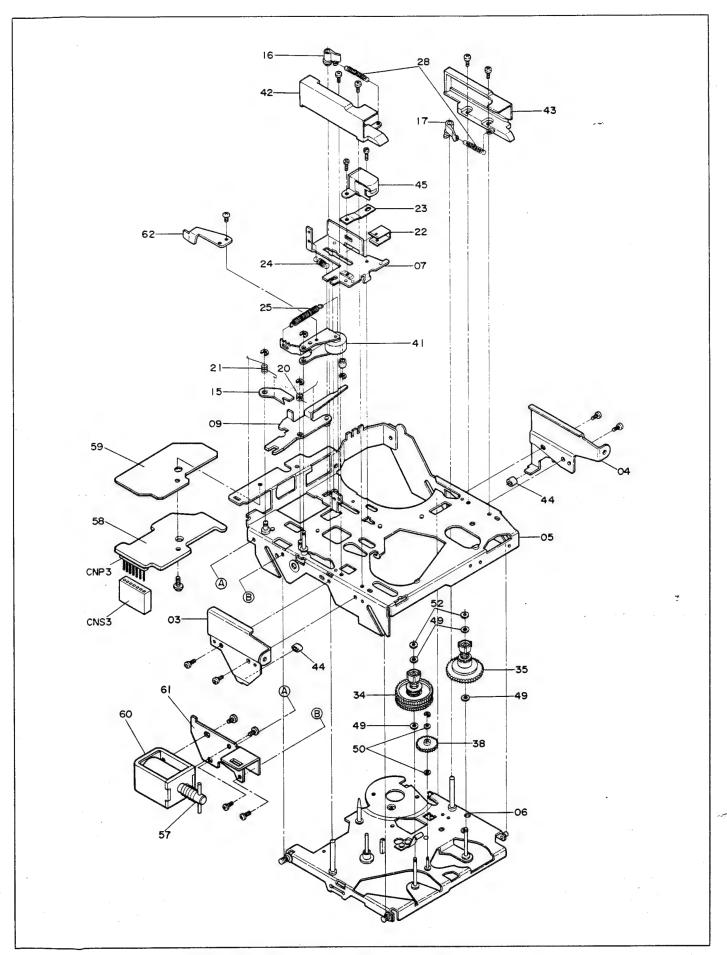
MECHANISM EXPLODED VIEW (UPPER SIDE)
